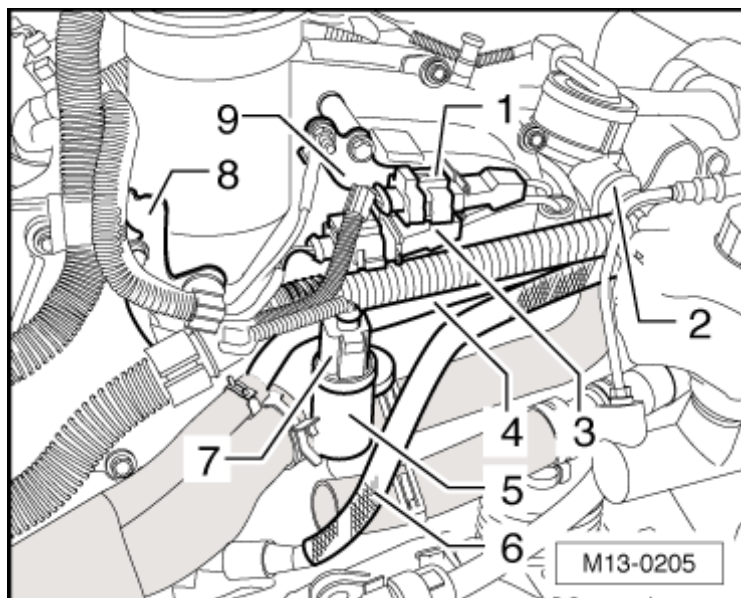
Identifying Vacuum Hose Disconnected From Vacuum Pump And Connector
